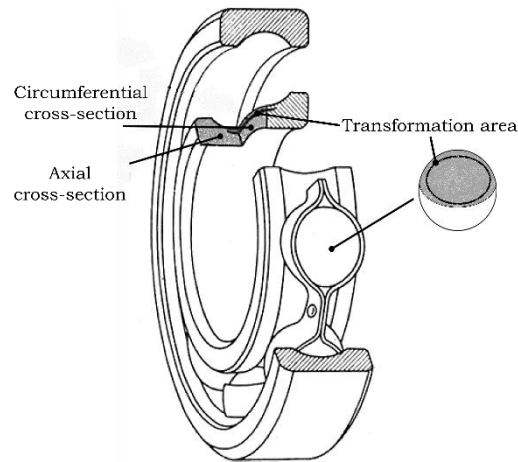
Ball bearing example indicating circumferential and axial cross-sections and transformation area in inner ring and ball element. Adapted from [54].
